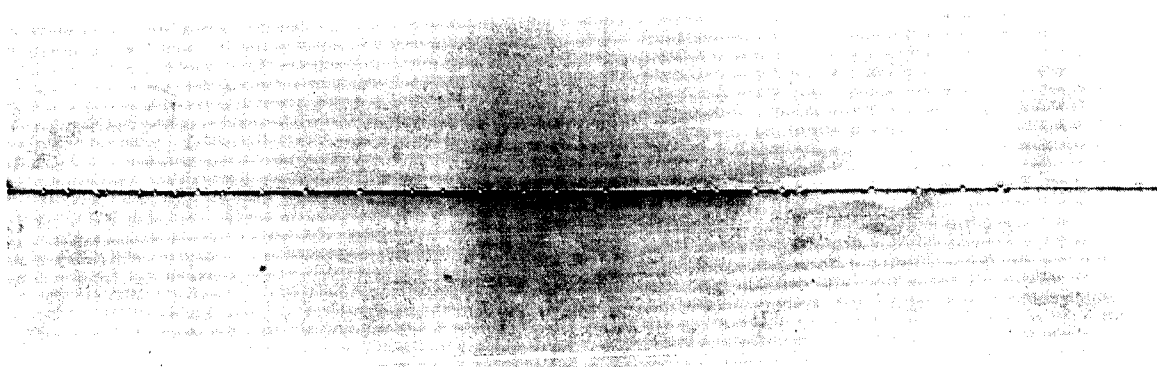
Electron beam welded magnesium plate revealing pit-type defects in weld bead. (R112573)
